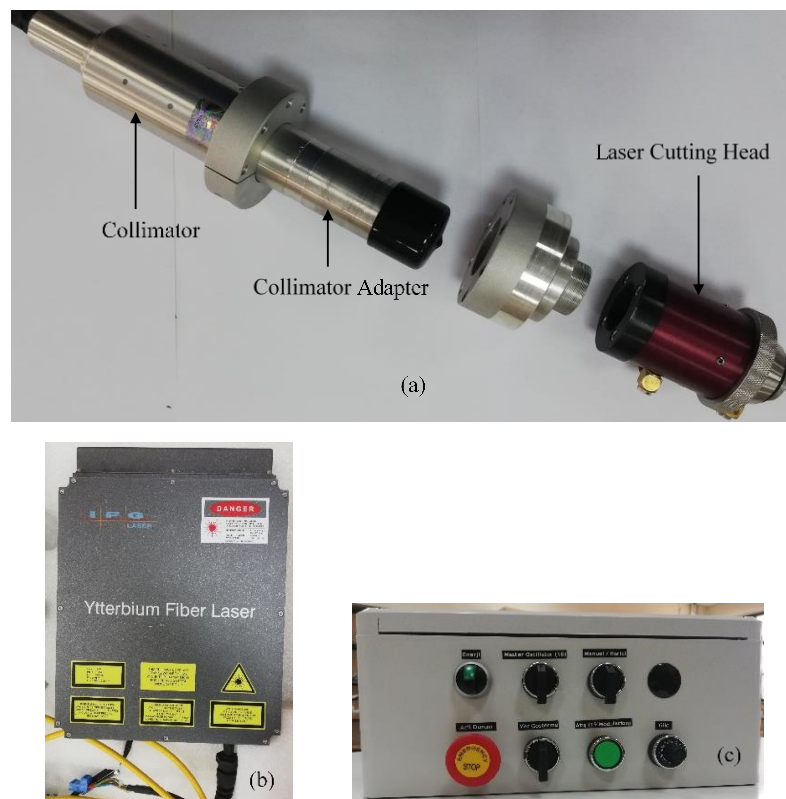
(a) PHF25 laser cutting head (HAAS Technologies Inc.), (b) YLP-1-120-50-50 HC resonator (IPG Laser Inc.), (c) electrical panel.
